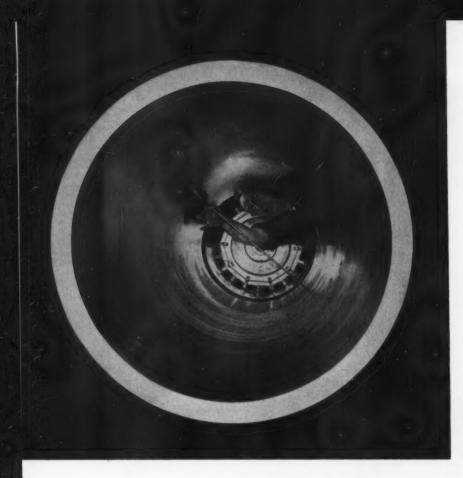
Checking the size and finish of the cylinder bore after the operation. Parts up to 21 feet long can be honed on the modified machine.
